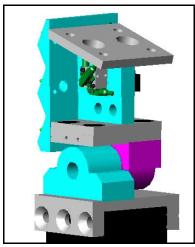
Lower Thoracic Spine Assembly mounted to Lower Pitch Change Mechanism
